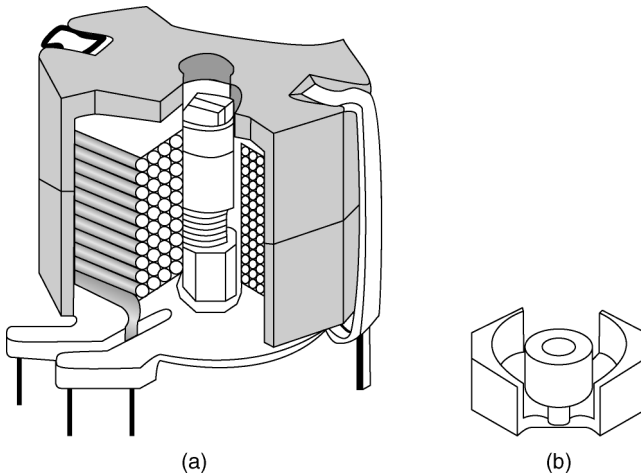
RM cores: (a) a cutaway view; and (b) a drawing of the core half. (Courtesy Magnetics Inc.)
